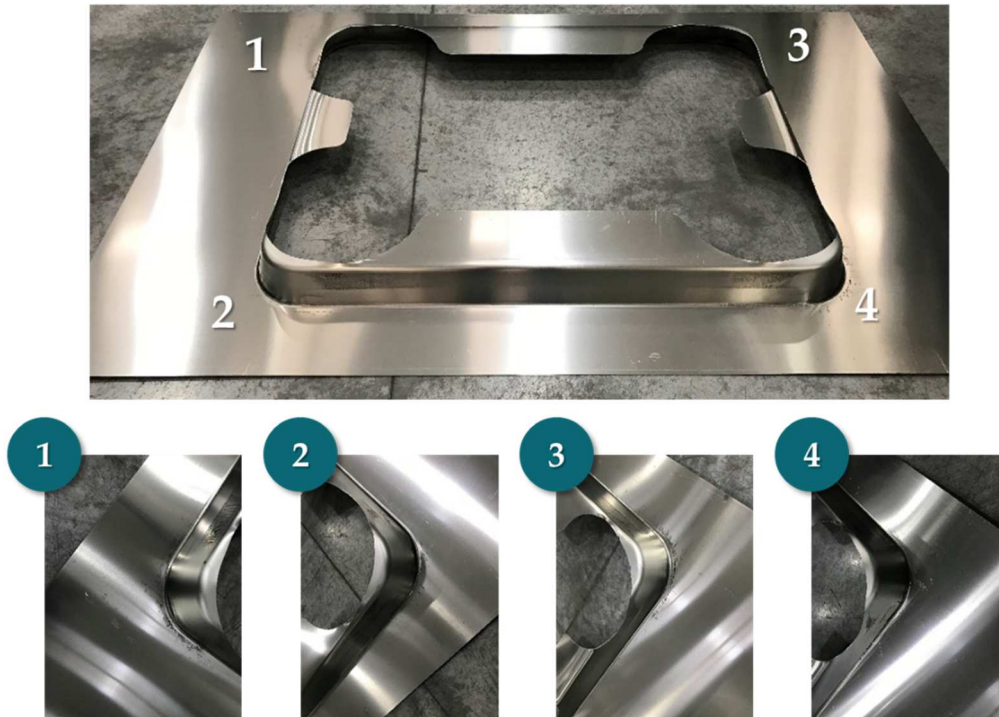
Stamping trial: sound component manufactured setting the punch speed at 20 mm/min
